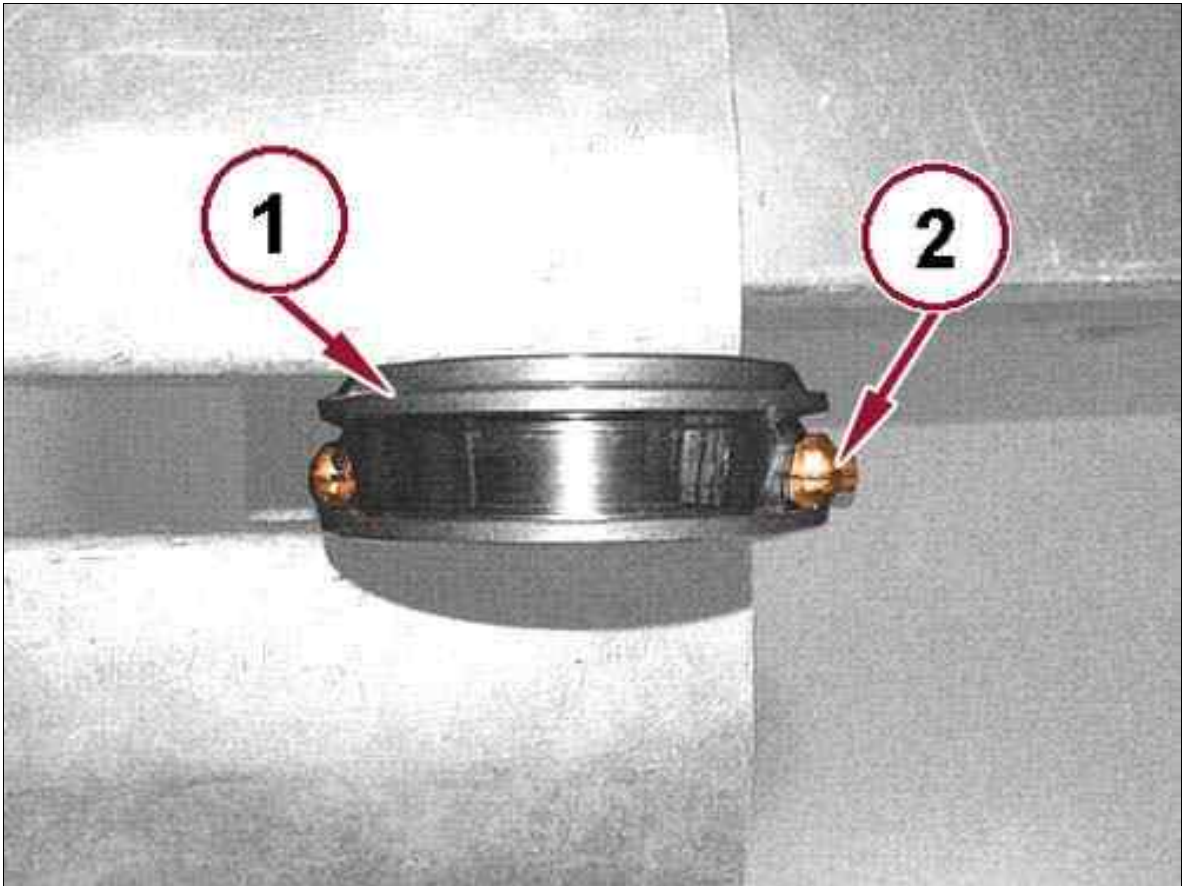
5th Speed Drive Gear Bushing, Spacer & Special Tool
